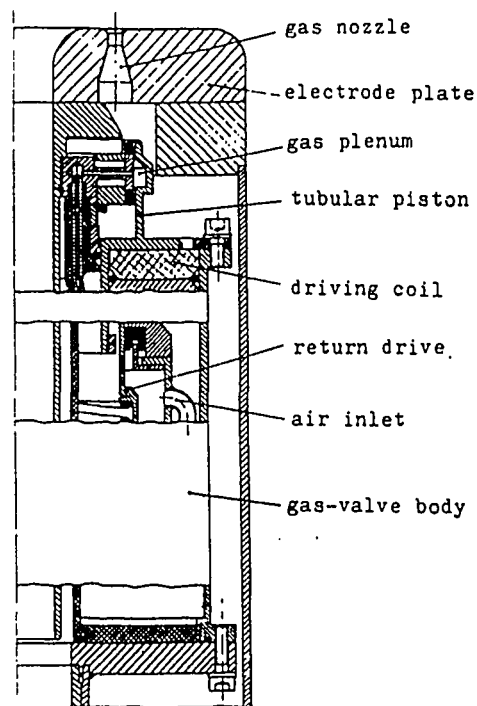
Assembly drawing of a gas-valve within inner electrode of POSEIDON facility.
